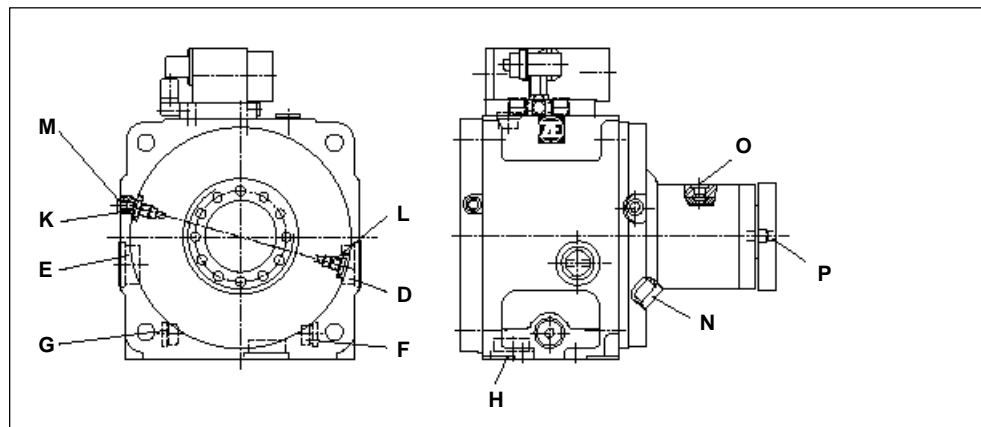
Selector gearbox with selector unit for frame sizes 132 and 160
